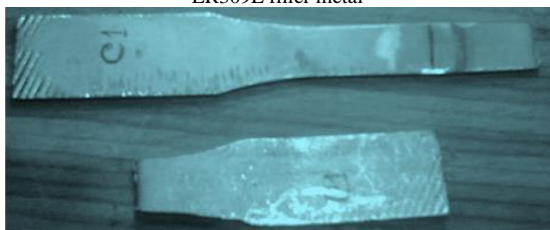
(f) Broken tensile specimen welded by MIG welding using ER430 filler metal.
